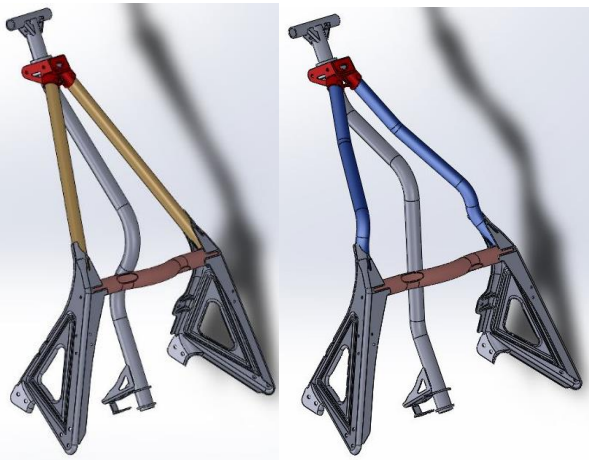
OEM Steering Shaft and S-Module vs New Parts
